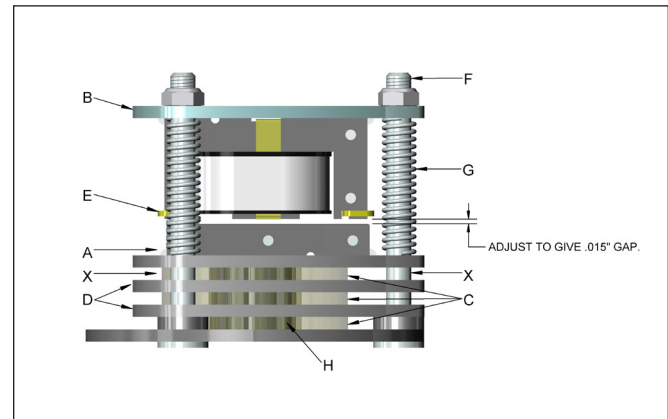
MOTOR BRAKE ADJUSTMENT
